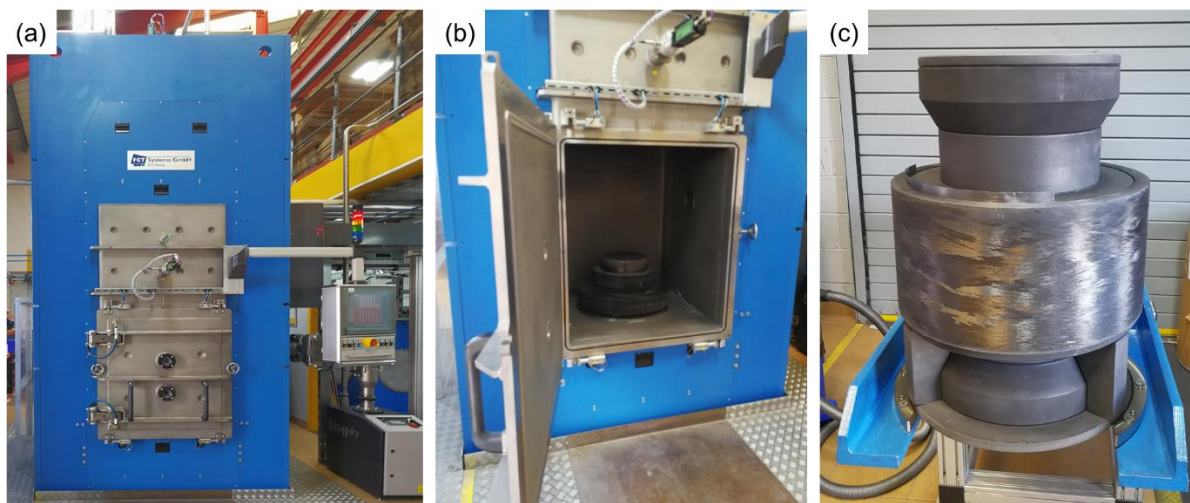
Photograph of the FCT Systems GmbH SPS Furnace Type H-HP D250 at Kennametal. (a) Photograph of the front of the machine, (b) photograph inside the FAST processing chamber with the bottom piston and (c) photograph of the graphite tool before processing it with FAST.
